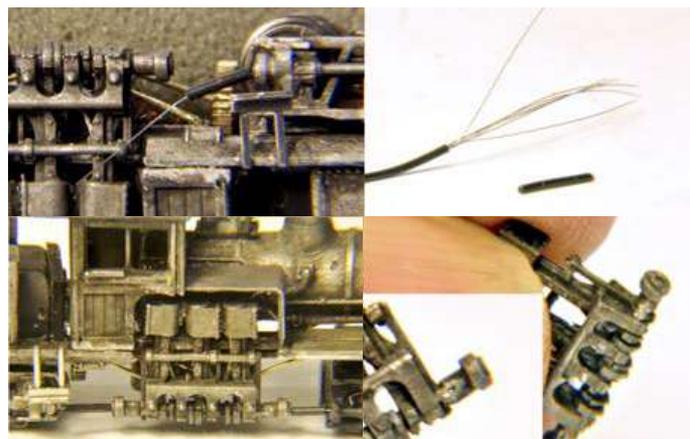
Truss rods: upper right is left side of locomotive, bottom right is right side of locomotive; left side shows view from bottom – note truss rods are terminated out of the way of the gear on the lay shaft.
